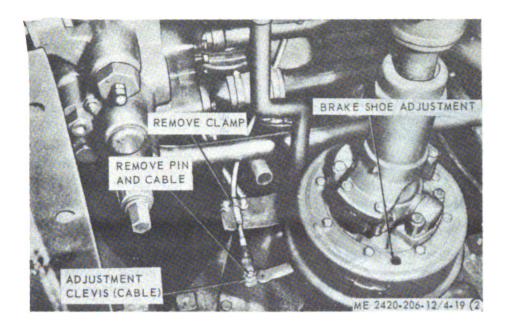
Parking brake hand lever and cable, removal and installation (sheet 2 of 2).
